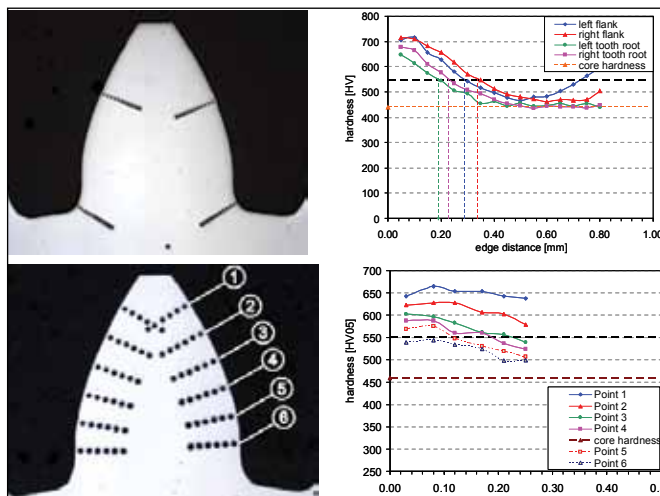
Measurement of the case depth of flank variant test gear (FL06: $z = 19$, above) and reference gear (FL045: $z = 19$, below) along tooth profile. Case depth graphic of FL045 is an example of one right flank.
